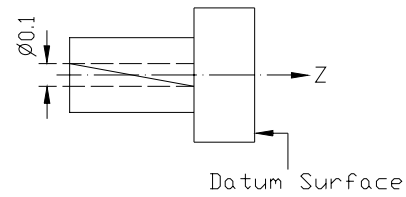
Tolerance zone of the axis of cylindrical feature
